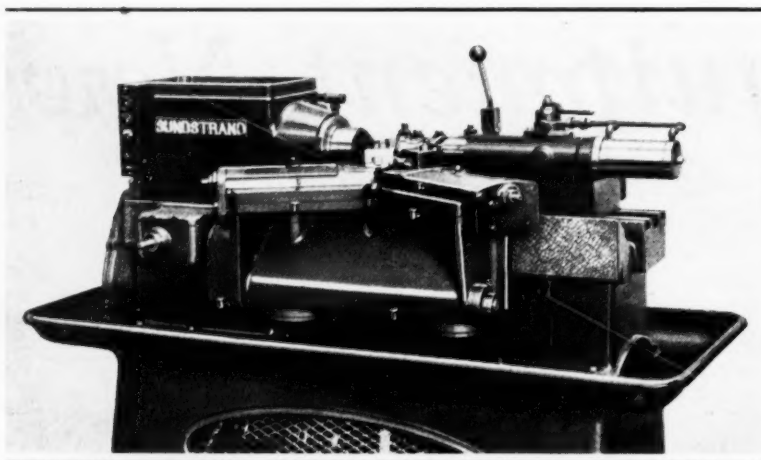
Four Angular Slides on this Six-inch Stub Lathe Form Steering-worm Blanks
